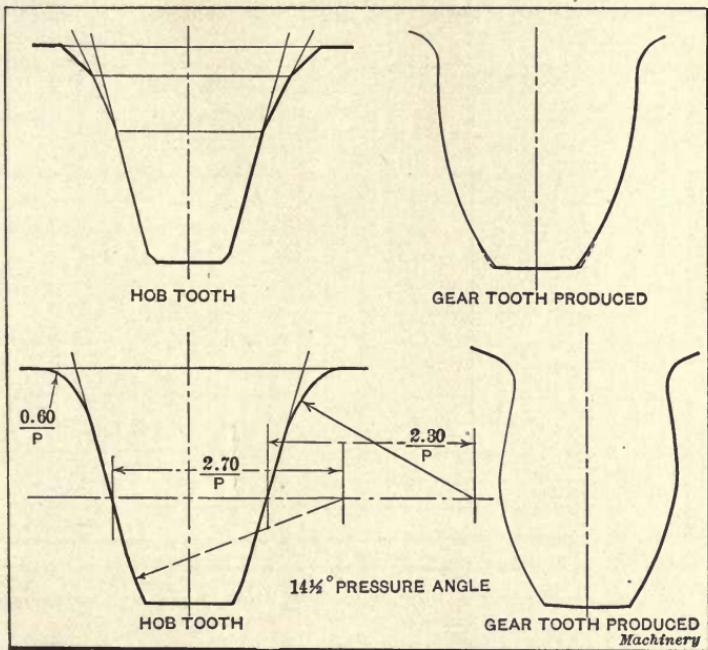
Forms of Hob Teeth and Gear Teeth Produced
